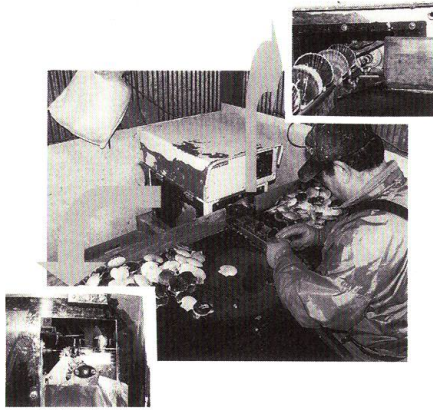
Picture of a worker operating an automatic drilling-machine.
